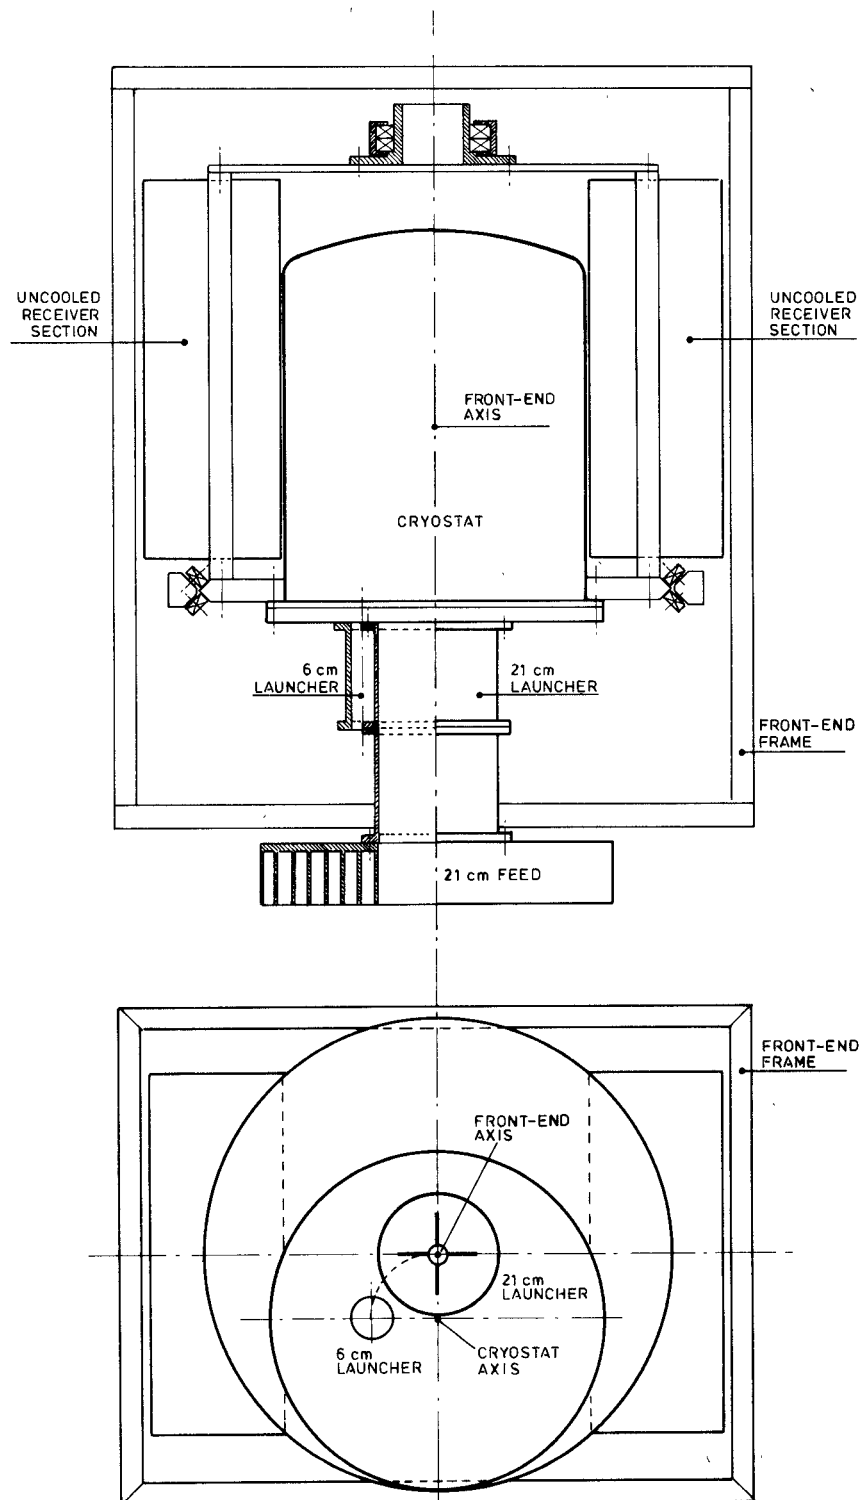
Mechanical layout of the multifrequency front-end receiver. (a) Scalar feed and the 21-cm launcher entering the cryostat. Flanking the cryostat are the two thermostats. The entire receiver rotates inside the front-end frame around the main axis. (b) 21-cm feed has been removed so that the apertures of both the 6-cm and the 21-cm launchers are visible. As can be seen, the cryostat is placed eccentrically with respect to the front-end main axis. The receiver fills a volume of about 1 m^3 ; it weighs 250 kg.
